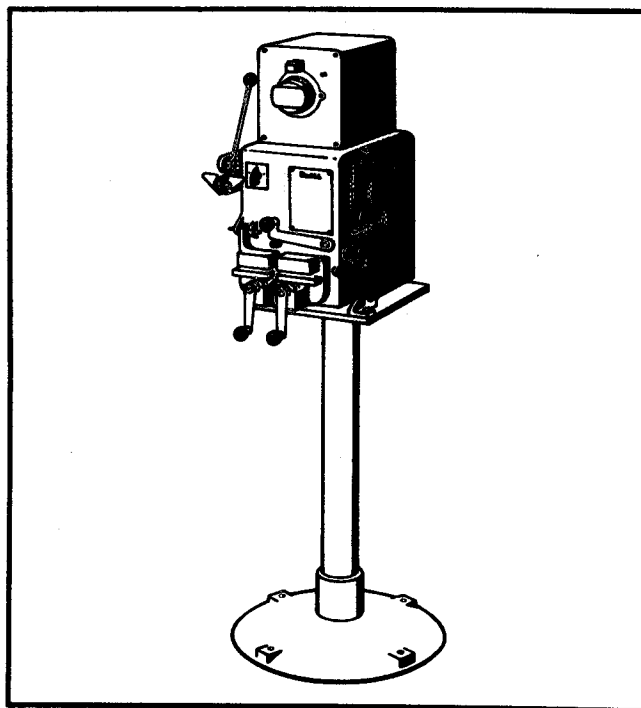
WELDER & GRINDER MOUNTED ON PEDESTAL.
